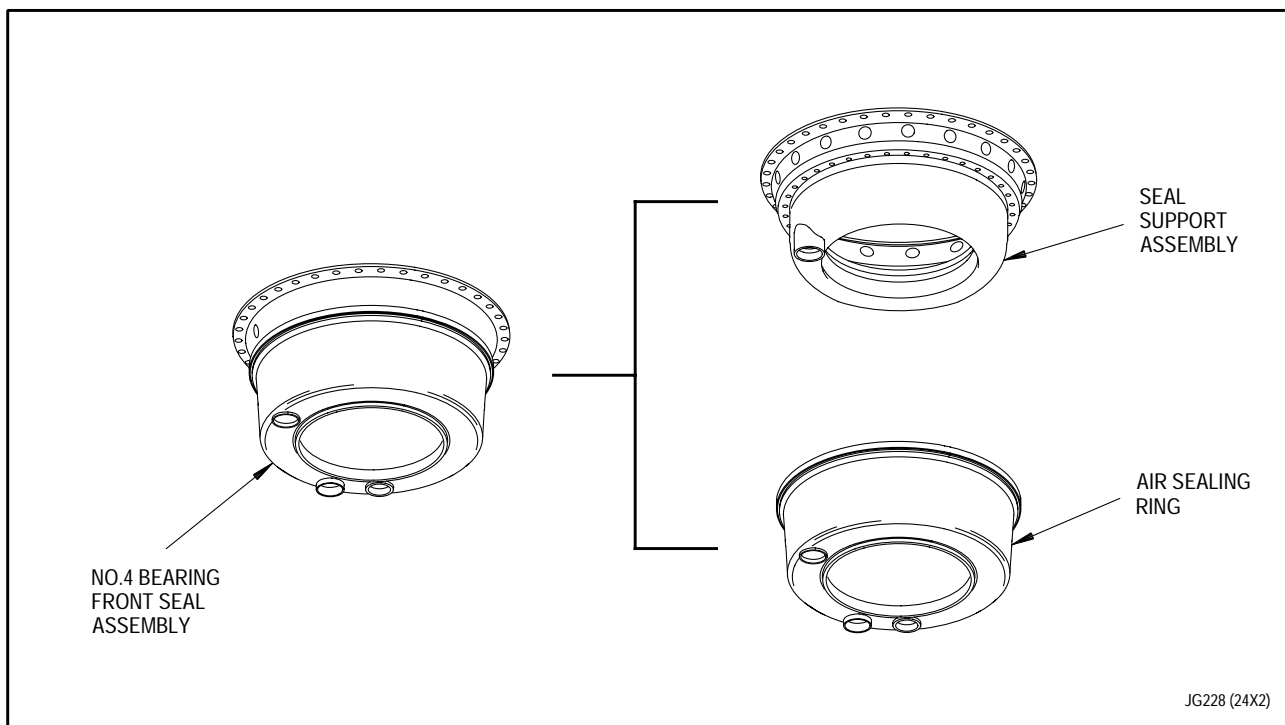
No. 4 Bearing Front Air Sealing Ring - Installation
